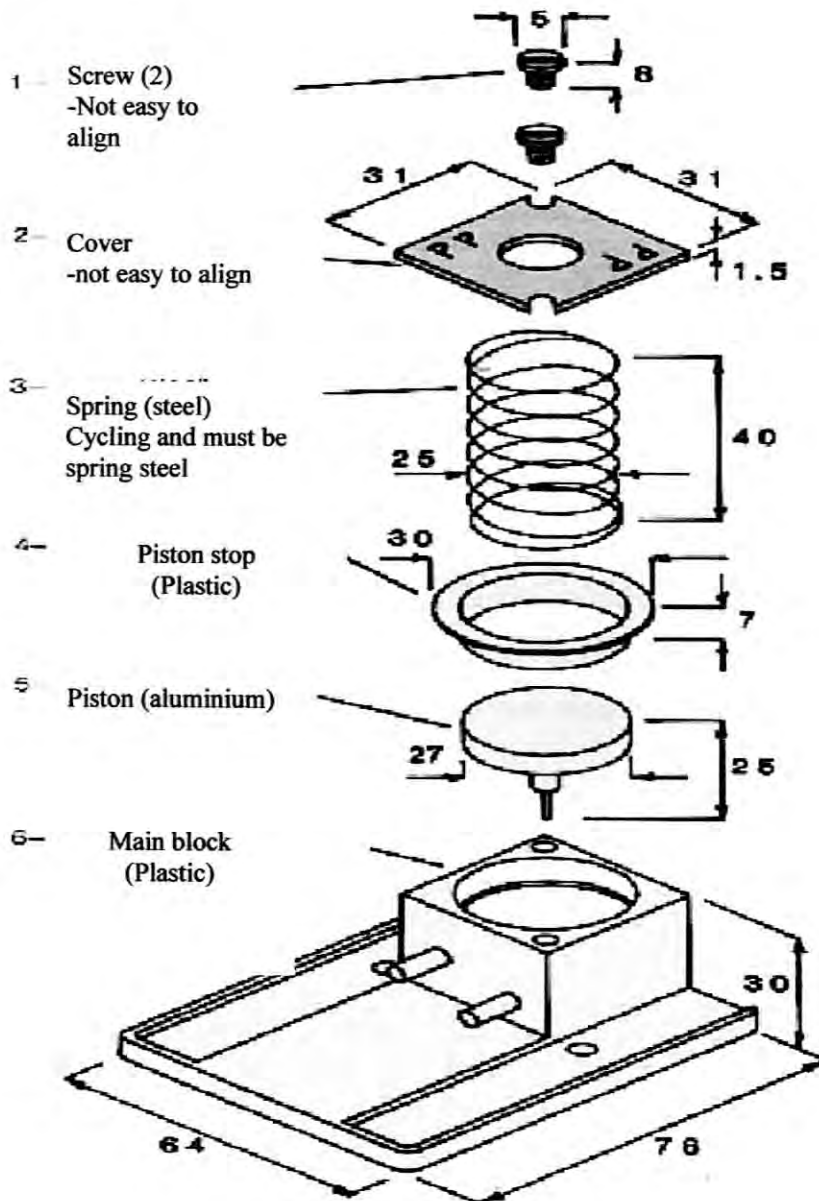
A piston-assembly design (Boothroyd 1991)
